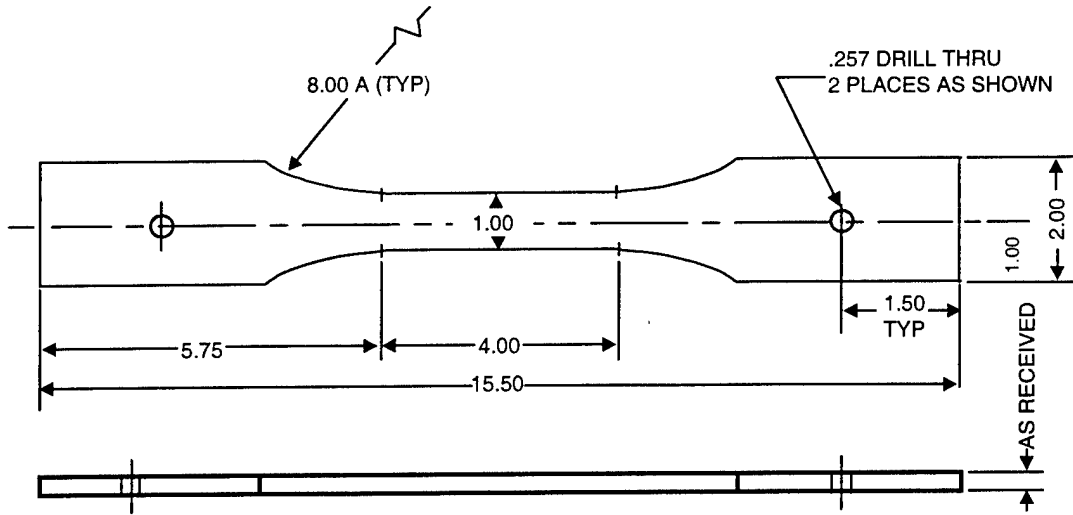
Drawing of Axial Fatigue Test Specimen
